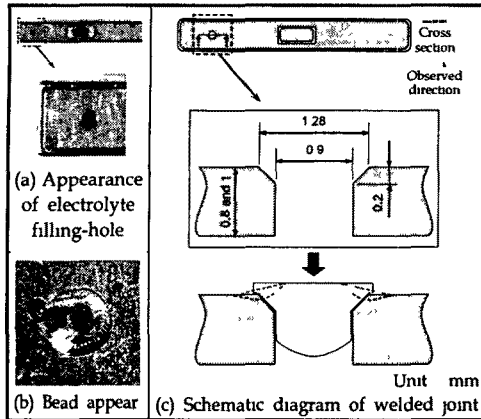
Appearance and schematic diagram of welded joint in ball-cap welding
